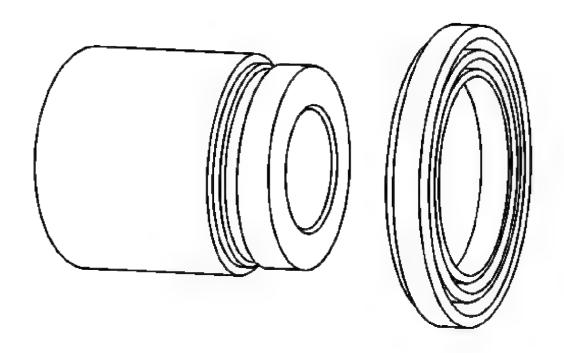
View Of Piston Dust Seal Courtesy of GENERAL MOTORS CORP.
